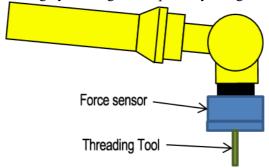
(a) When rotating the workpiece centered on the TCP and threading using a robot only
